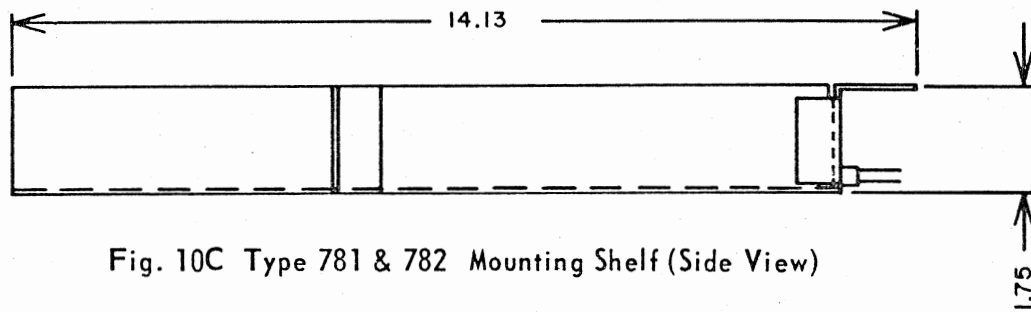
C Type 781 & 782 Mounting Shelf (Side View)
